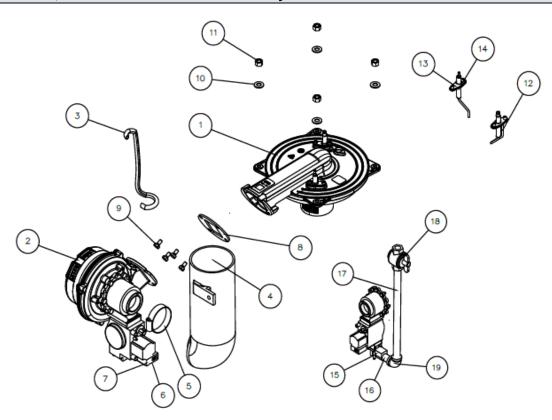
Blower, Burner and Gas Train Exploded Drawing
